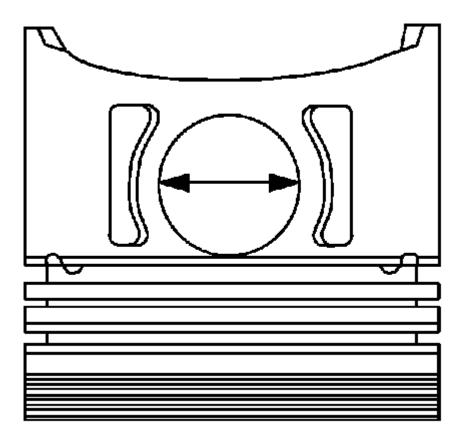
Measuring Piston Pin Diameter Courtesy of GENERAL MOTORS CORP.
